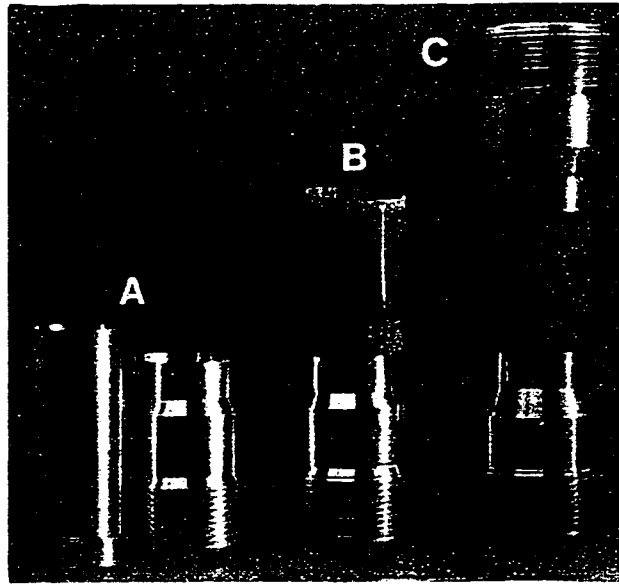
Specimens with bonded aluminum threaded connections; (a) inner and outer tabs prior to assembly, (b) specimen failure by fiber pull-out, and (c) assembled specimen prior to testing.
